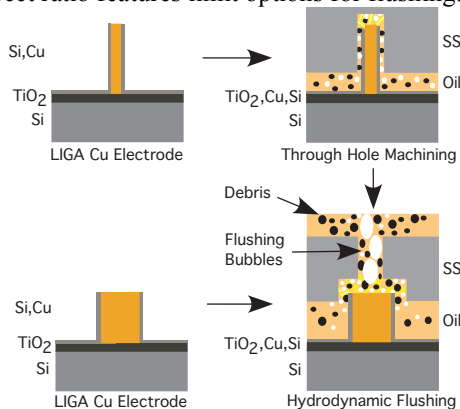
Machining process for debris flushing. Step 1: machine narrow through-holes, Step 2: machine finished pattern overlaid on top. Flushing bubbles and tool dither force debris out the through-hole.
